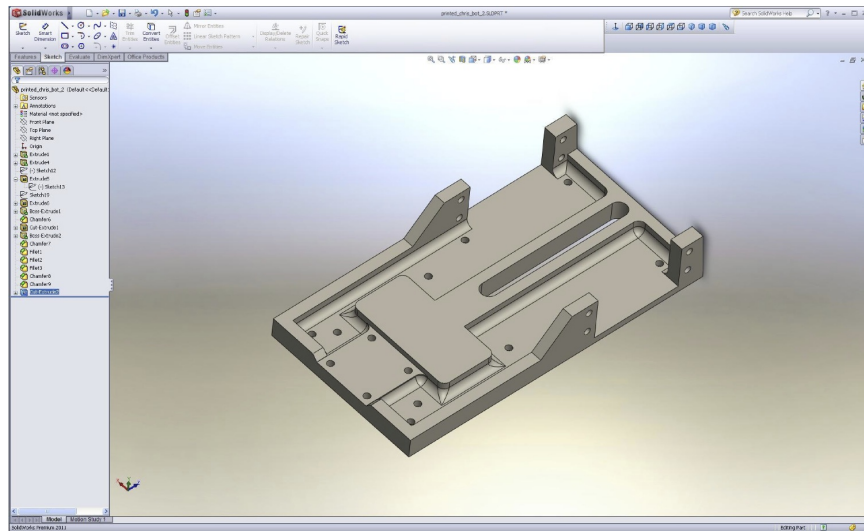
Chassis Re-Design with Adjusted Servo Mount
